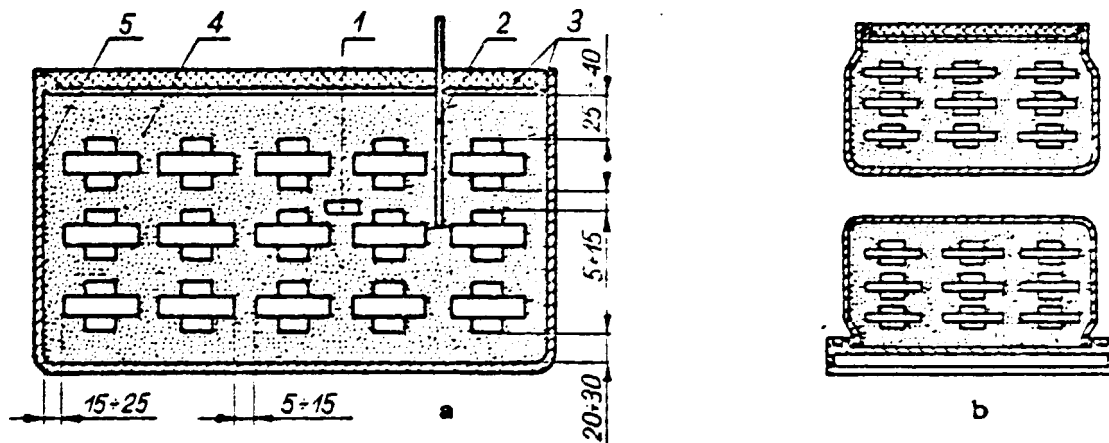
The box for carburizing in powders: a - loading style into the box; b - box loading style into the furnace; 1 - inside testing specimen; 2 - outside testing specimen; 3 - seal with a clay; 4 - carburizing powder; 5 - box /casted of the heat resisting cast steel or welded with low-carbon steel sheets and next aluminized/.
